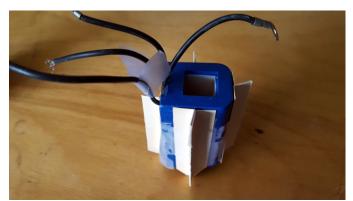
Two contactor actuator coils form the basis of this 1:1 transformer. Cardboard fins, added to the coil assembly, will center it when inserted into its mold container.
